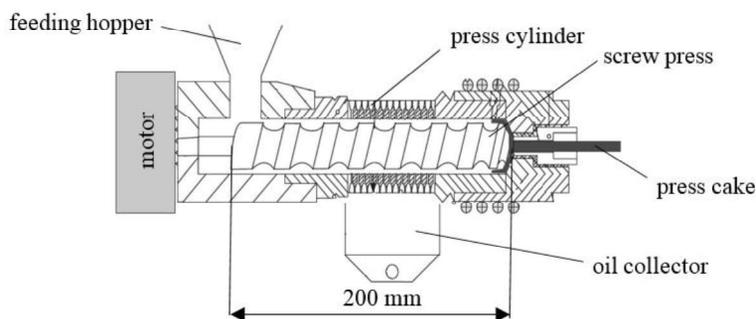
Scheme of mechanical screw press for oil extraction (Karaj & Müller, 2011).
